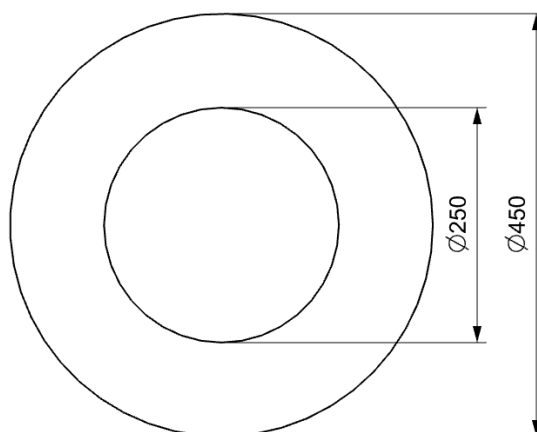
"Tophat" carbon fibre cutout for the front inner and rear wheel shells.
